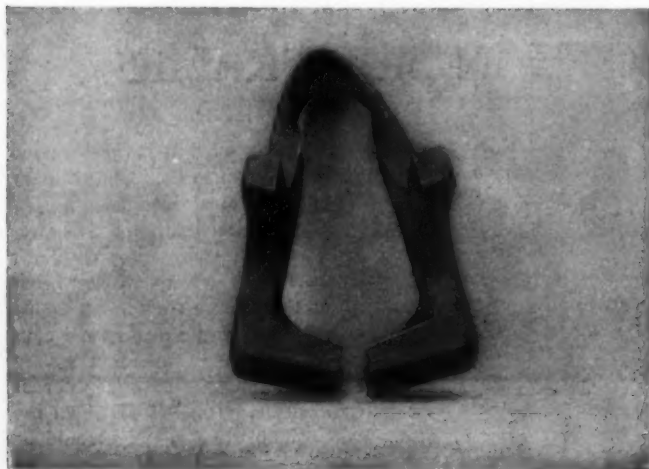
C-46-O Krupp steel chassis frame cross member. Flattened down under the hammer with no sign of cracking.
